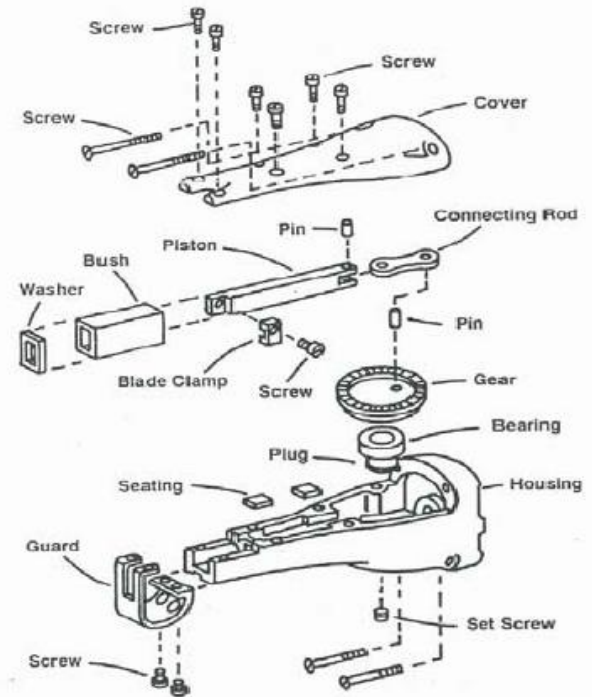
Power saw (new design—29 parts, 2.58 min assembly time). (After Ref.
